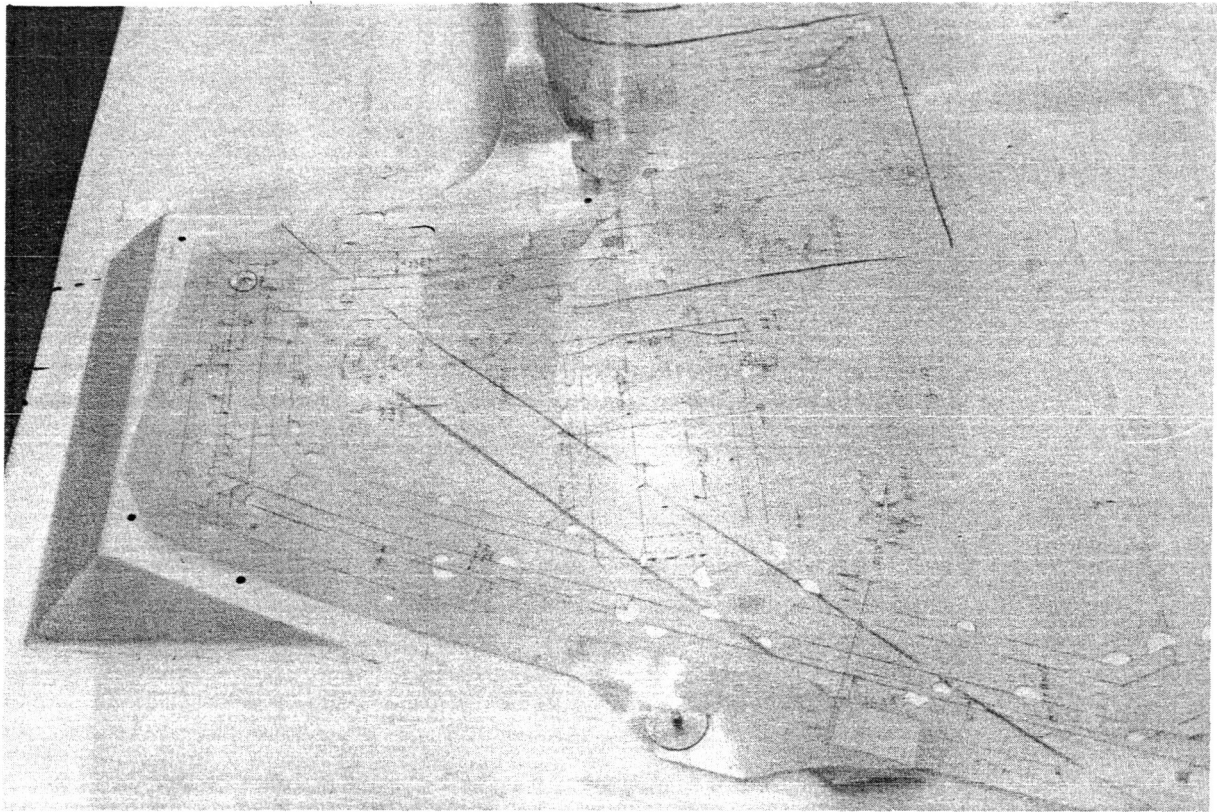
Skin Panel Layup Tool Showing Outboard End and Forward Layup Areas
